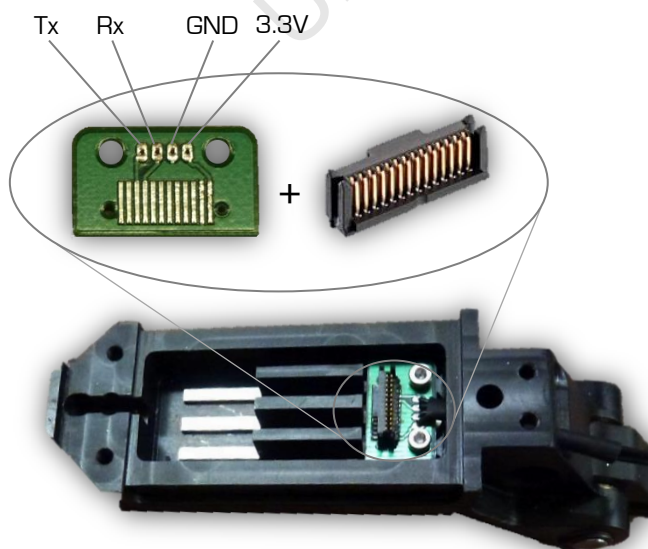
9205i Sensor Mount in the Gripper Finger [55]
